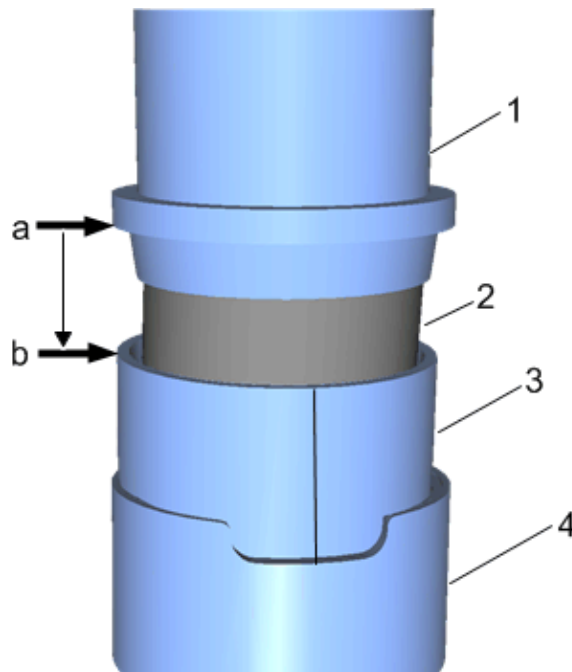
Upper Tool Rim With Top Of Receiver Cup
